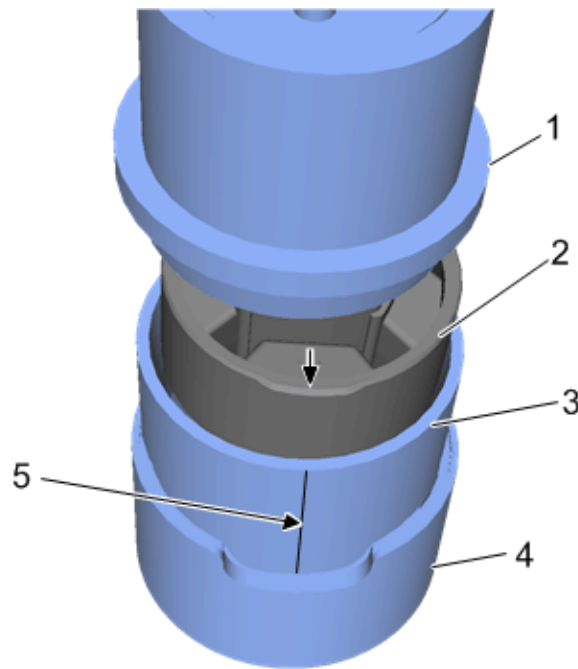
Cradle Bushing Remover/Installer Receiver Cup, Transmission Mount And Alignment Mark
